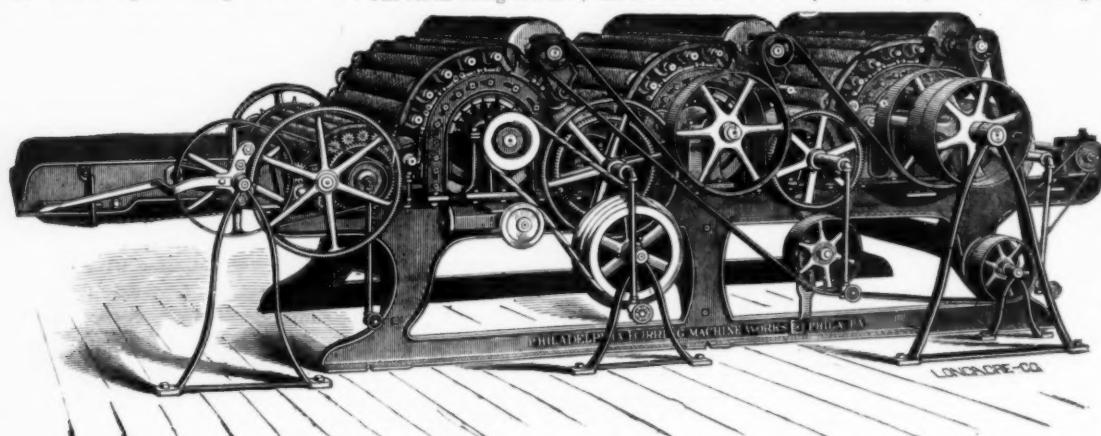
RIGHT HAND SIDE VIEW OF THREE CYLINDER BREAST GARNETT MACHINE.
